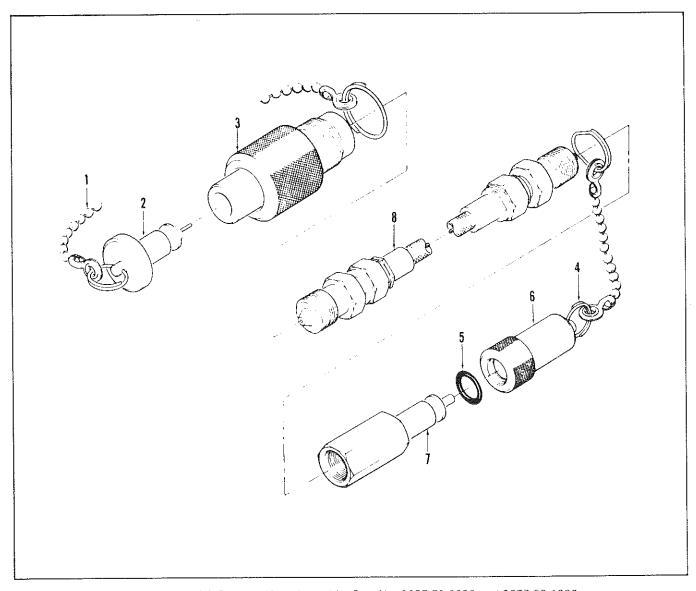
High-Pressure Hose Assembly, Part No. 3657-59-0600 and 3657-59-1200
